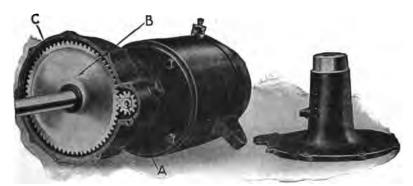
and 34.—Wagner starting motor of two unit starting and lighting system. It is series wound, and equipped with reducing gear, with a gear reduction for reducing the speed of the motor so that it will be suitable for cranking the engine. This gear equipment consists of a small steel pinion A on the motor which meshes with a large steel gear B on the back shaft, thereby reducing the speed. These gears are encased in the cast iron housing C. The motor is connected to the engine by means of a chain which operates from a sprocket on the starter to a sprocket on the engine shaft. The motor is adapted for electrical connection to the battery by means of a starting switch. This switch is usually installed on the foot board of the car, and when the pedal is pressed down, contact is made between the battery and the starter, thereby cranking the engine.
